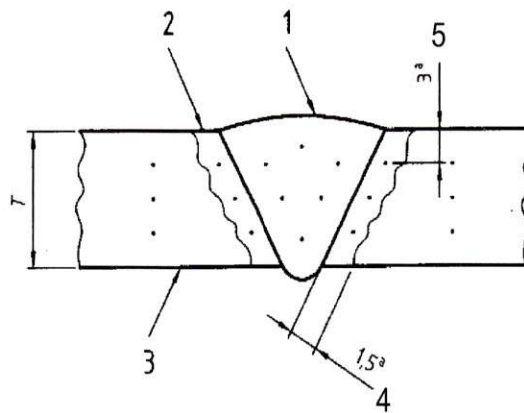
Charpy V-notch Weld Metal (WM) Specimen Location
